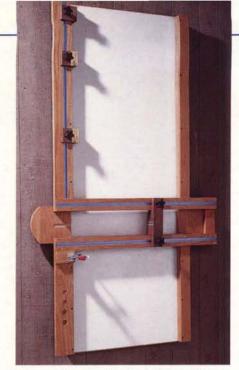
Attach the rails to the melamine deck with screws and glue. Cover the exposed screw holes with walnut plugs.
